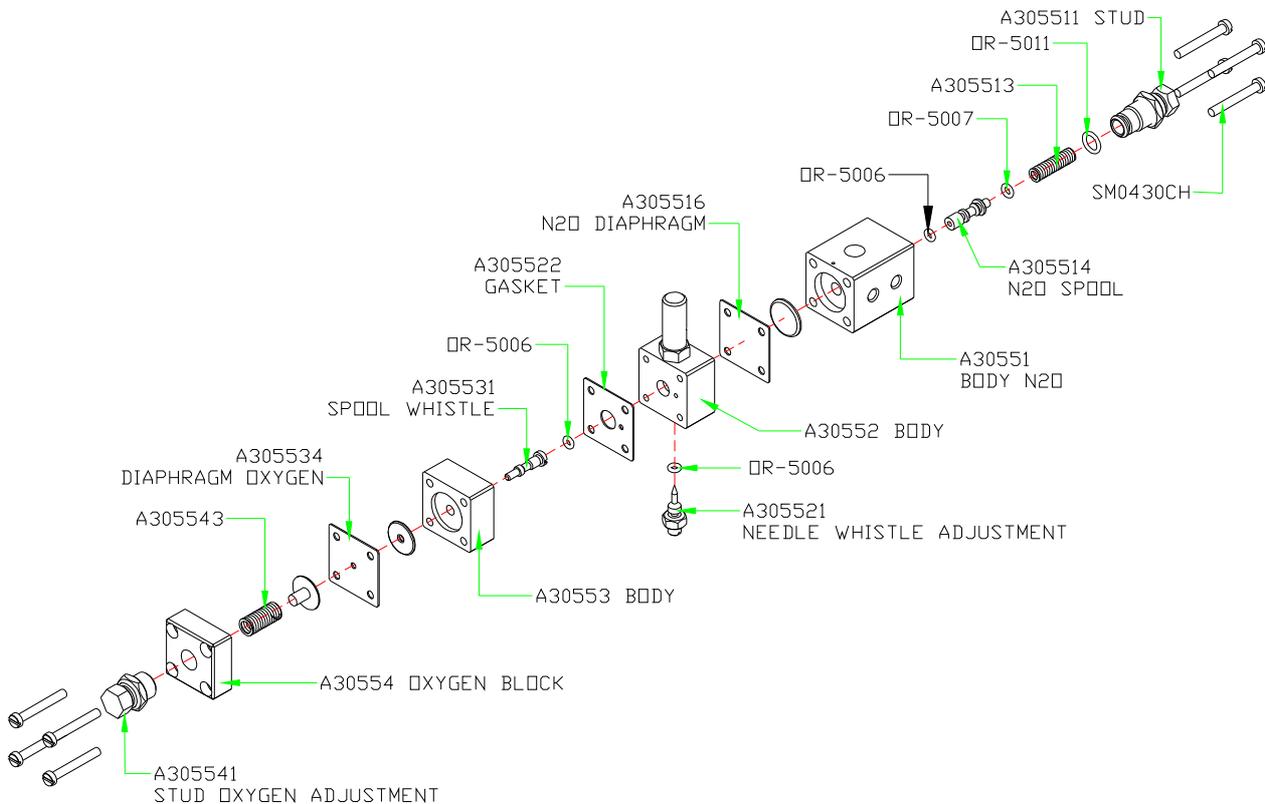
Exploded View A6055 Oxygen Failure Alarm
